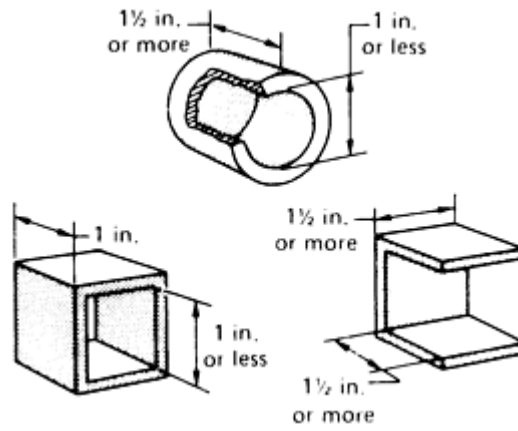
Typical workpiece configurations with accompanying dimensions that require the use of conforming anodes to ensure uniform plate thickness
